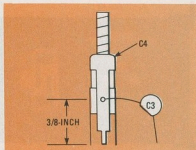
CAPACITOR C3 should be soldered to leg of trimmer C4 before it is mounted on board. Capacitors C5/C6, C8/C9, and C10/C11 should be prepared the same way.
